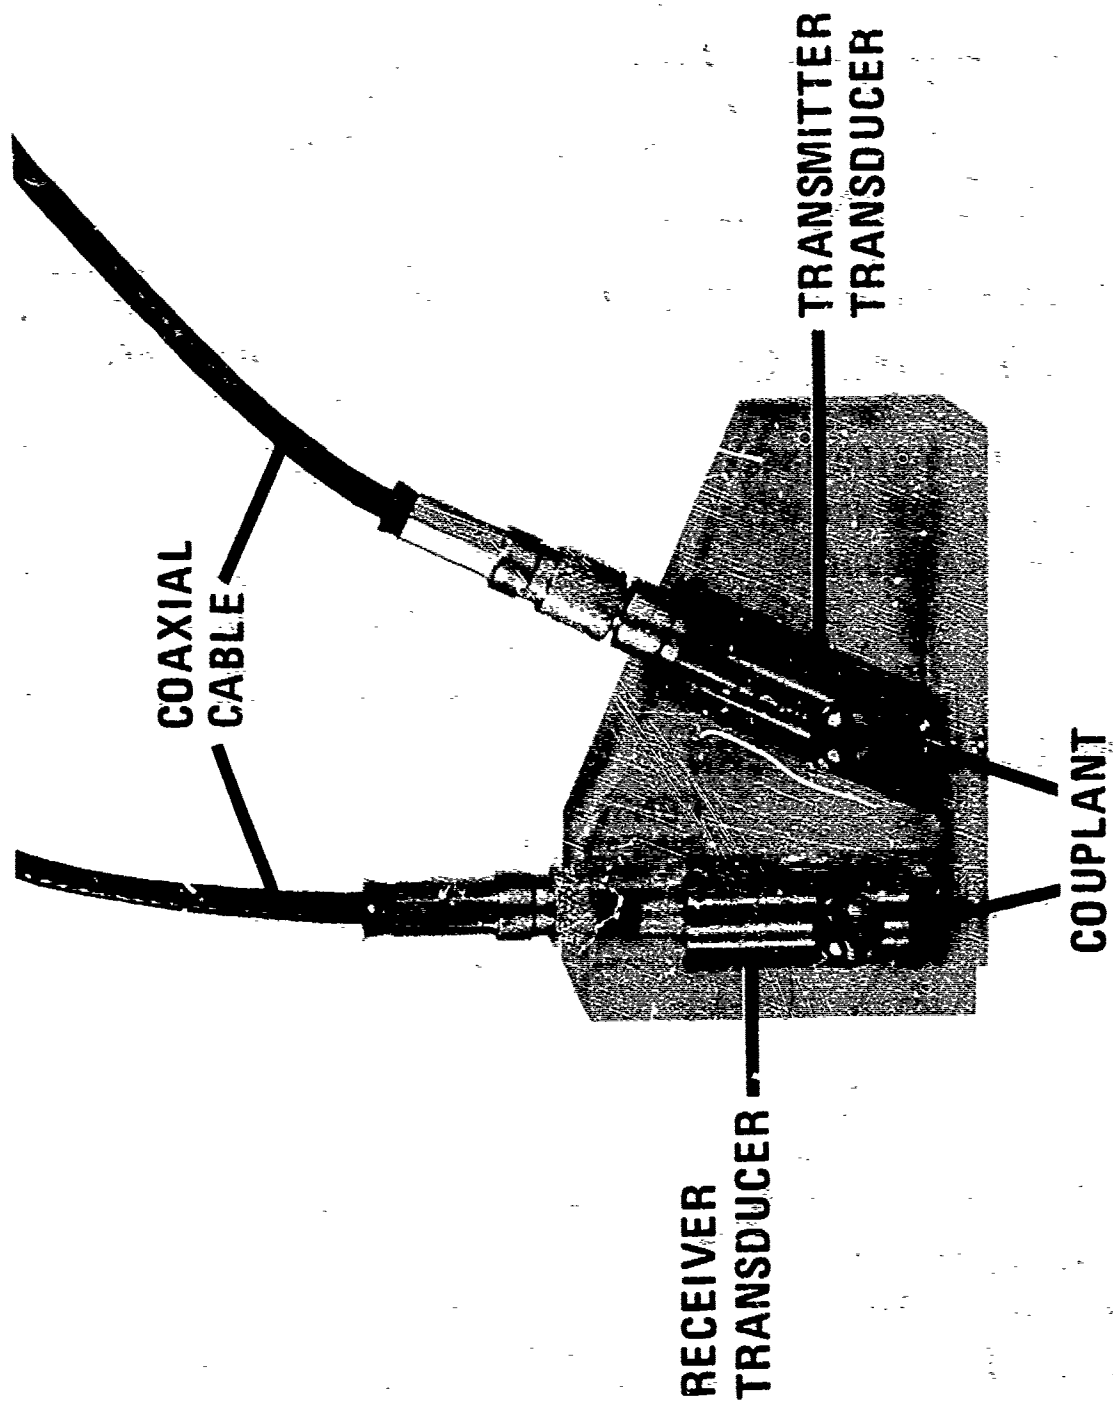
TRANSDUCER HOLDER — DELTA TECHNIQUE
